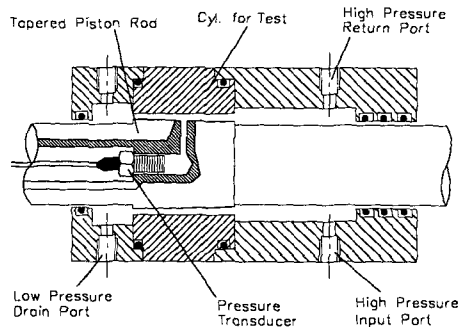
Sectional view of the piston and cylinder for pressure measurement.
